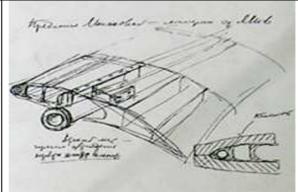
Sketch of composite blade layout Mi-6 main rotor blade incorporating a spar comprising several tubes attached to each other by their flanges.
